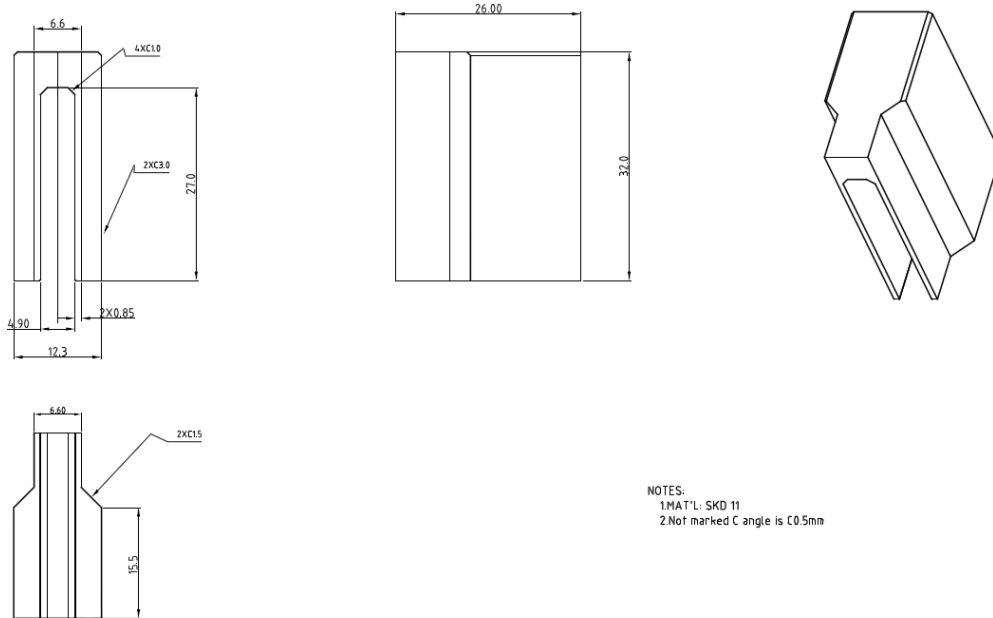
Orthogonal MINI Cool edge connector 1X2 application tools drawing
